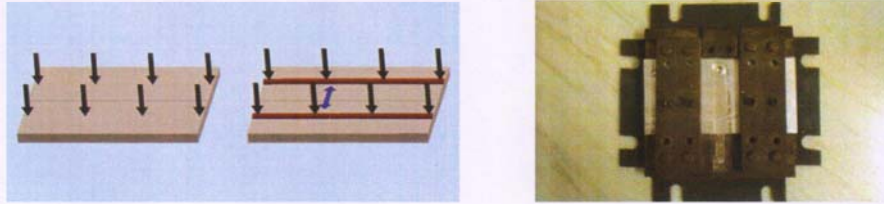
(a) Clamping the plates from top (b) Fixture fabricated and used for FSW
